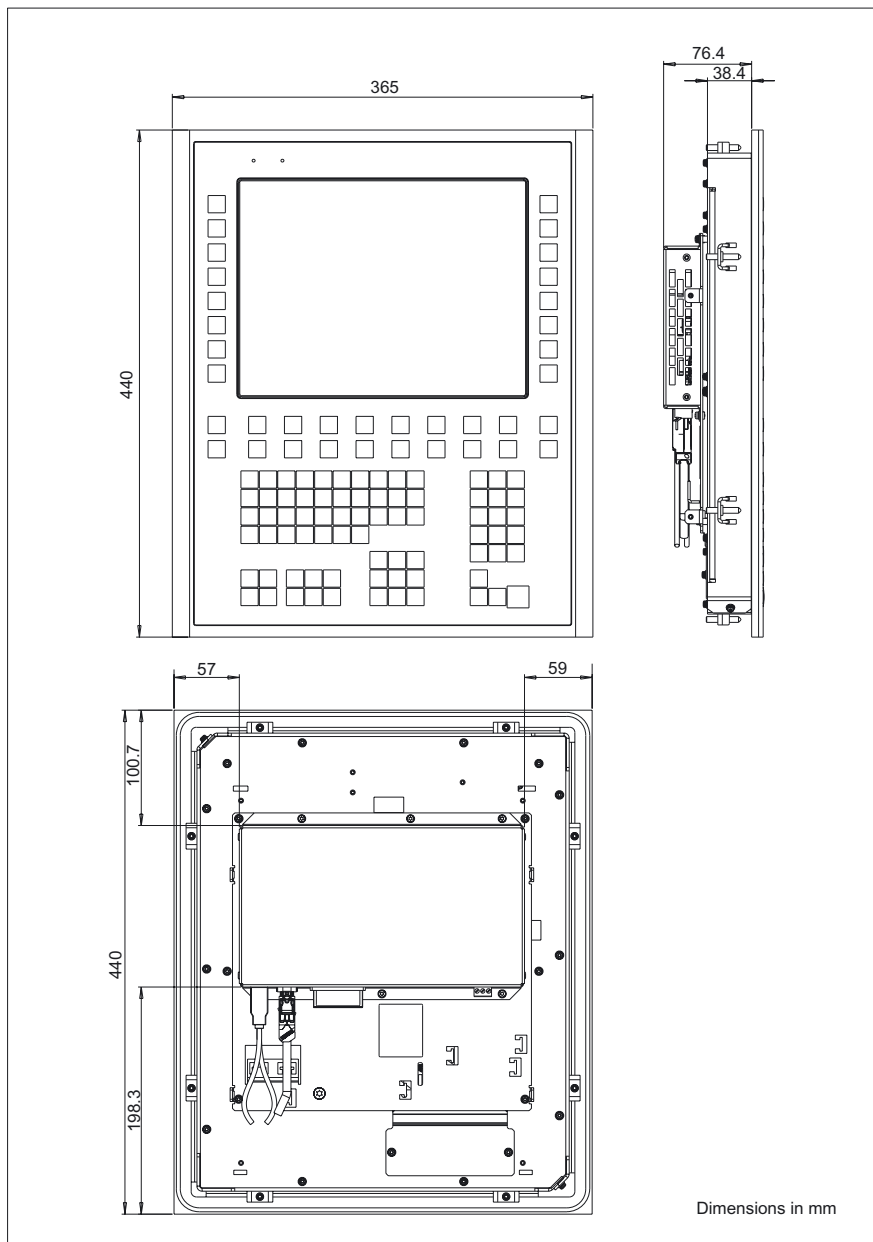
Dimensional drawing of OP 012T without direct control key module
